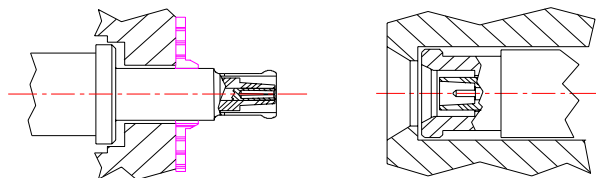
TM-12 contact interfaces shown installed in 38999 shell (shown enlarged)
